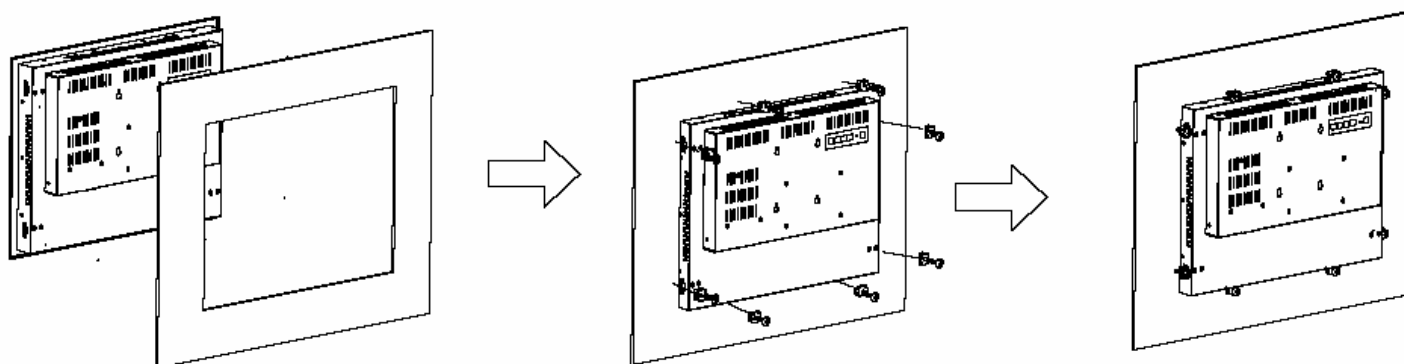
Figure A: Panelmounting of the ADP1120/1150/1170/1190
